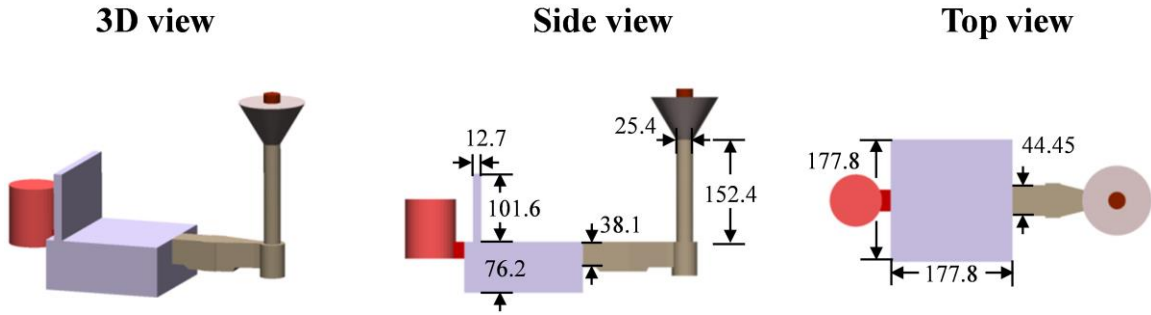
Geometry of casting with thin section. All dimensions in mm.
